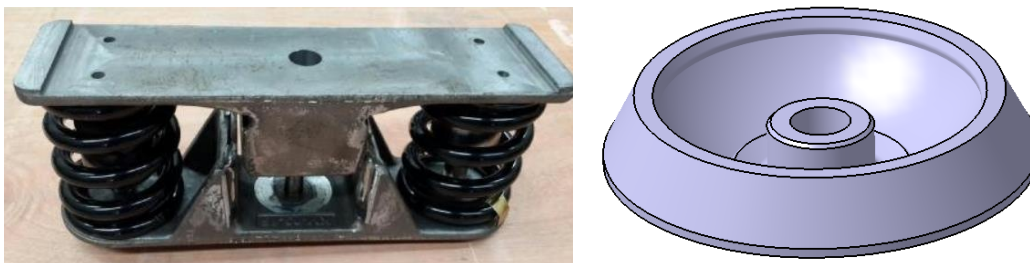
Side bearer(left) [8] and hemi-spherical pivot housing (right)
